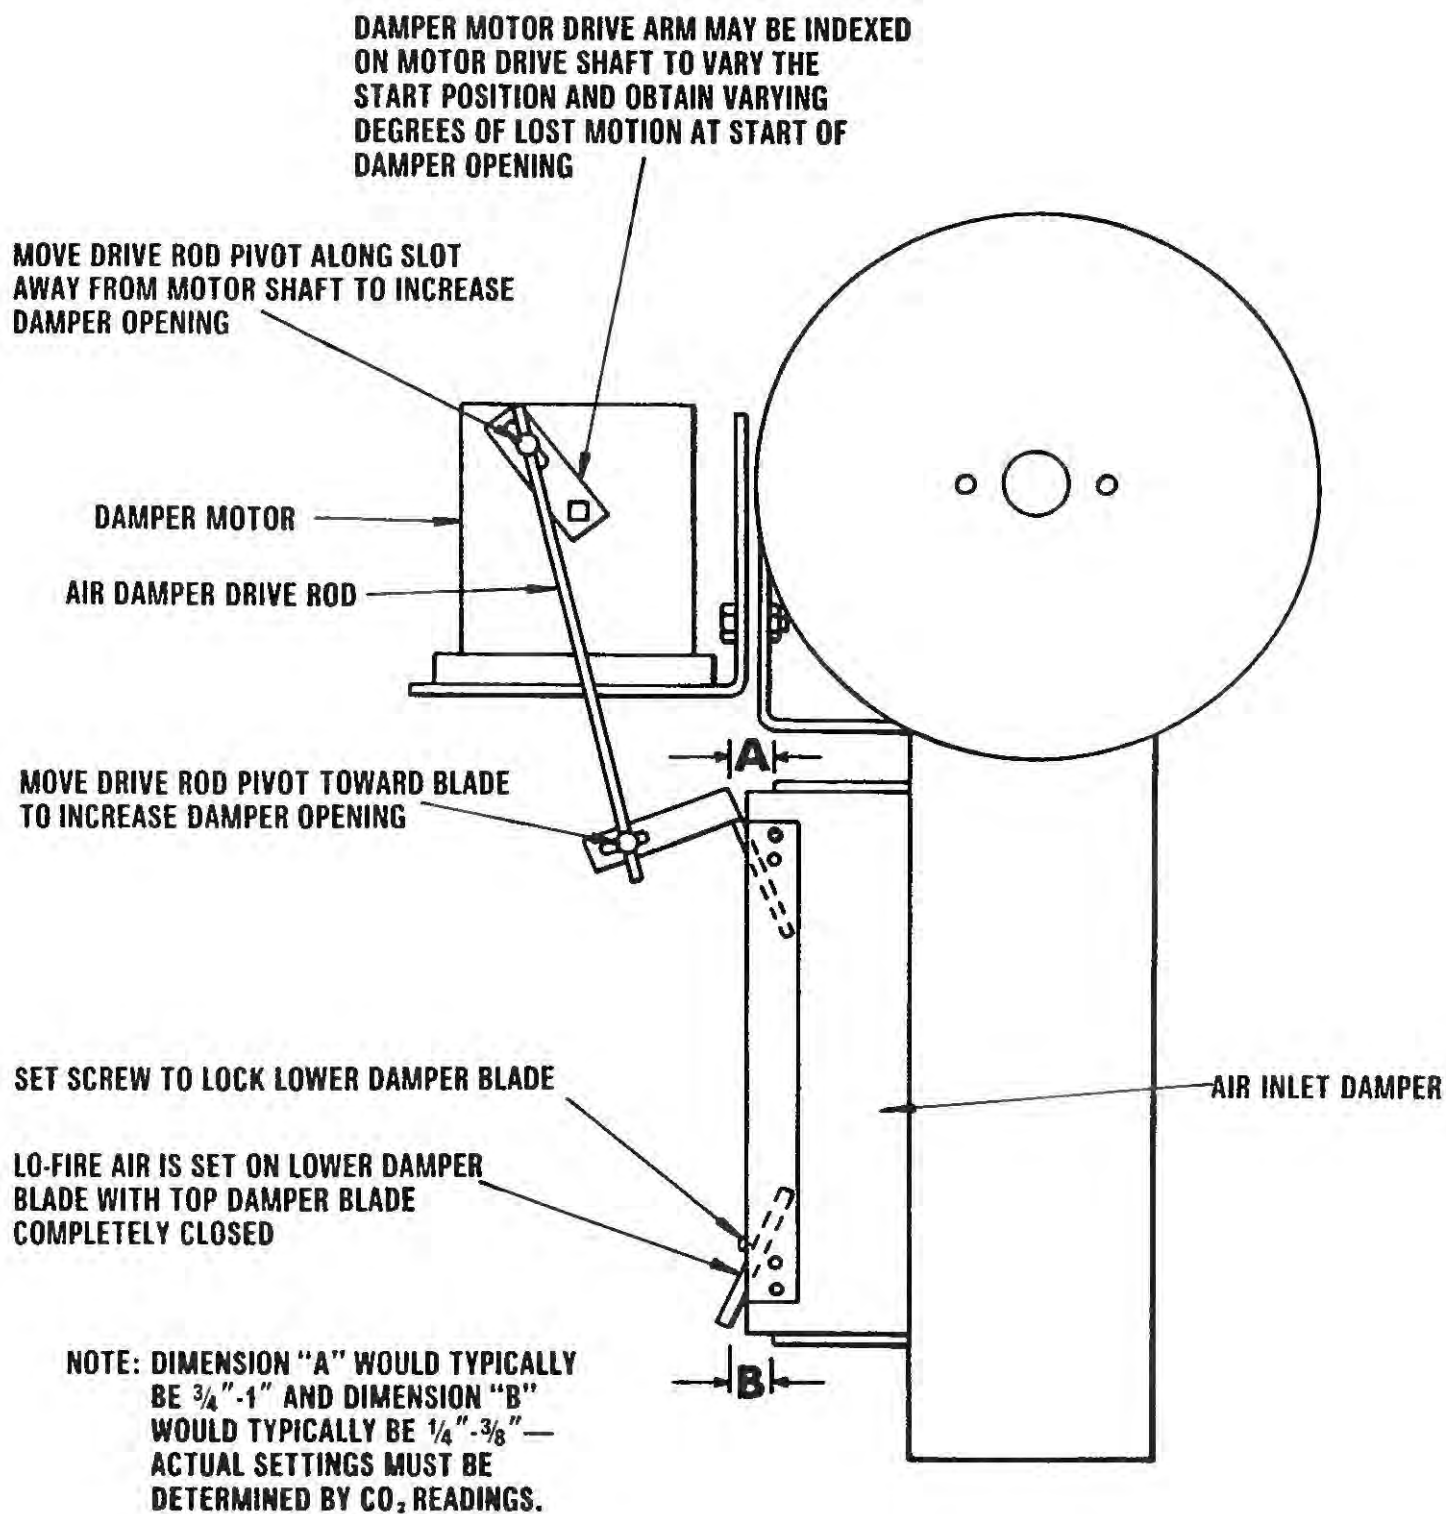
AIR DAMPER ADJUSTMENTS - 60 THRU 80 HP.
